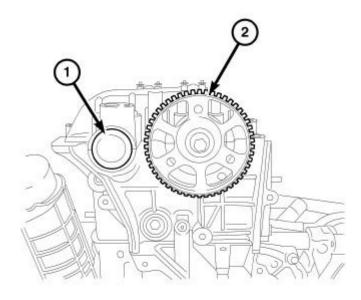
CAMSHAFT OIL SEAL INSTALLATION Courtesy of CHRYSLER LLC
